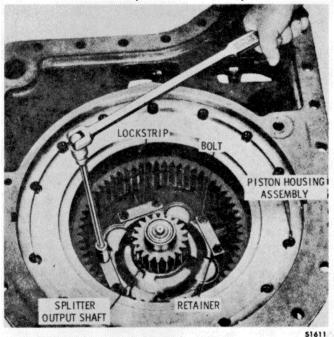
Removing Splitter Output Shaft Retainer Bolts
